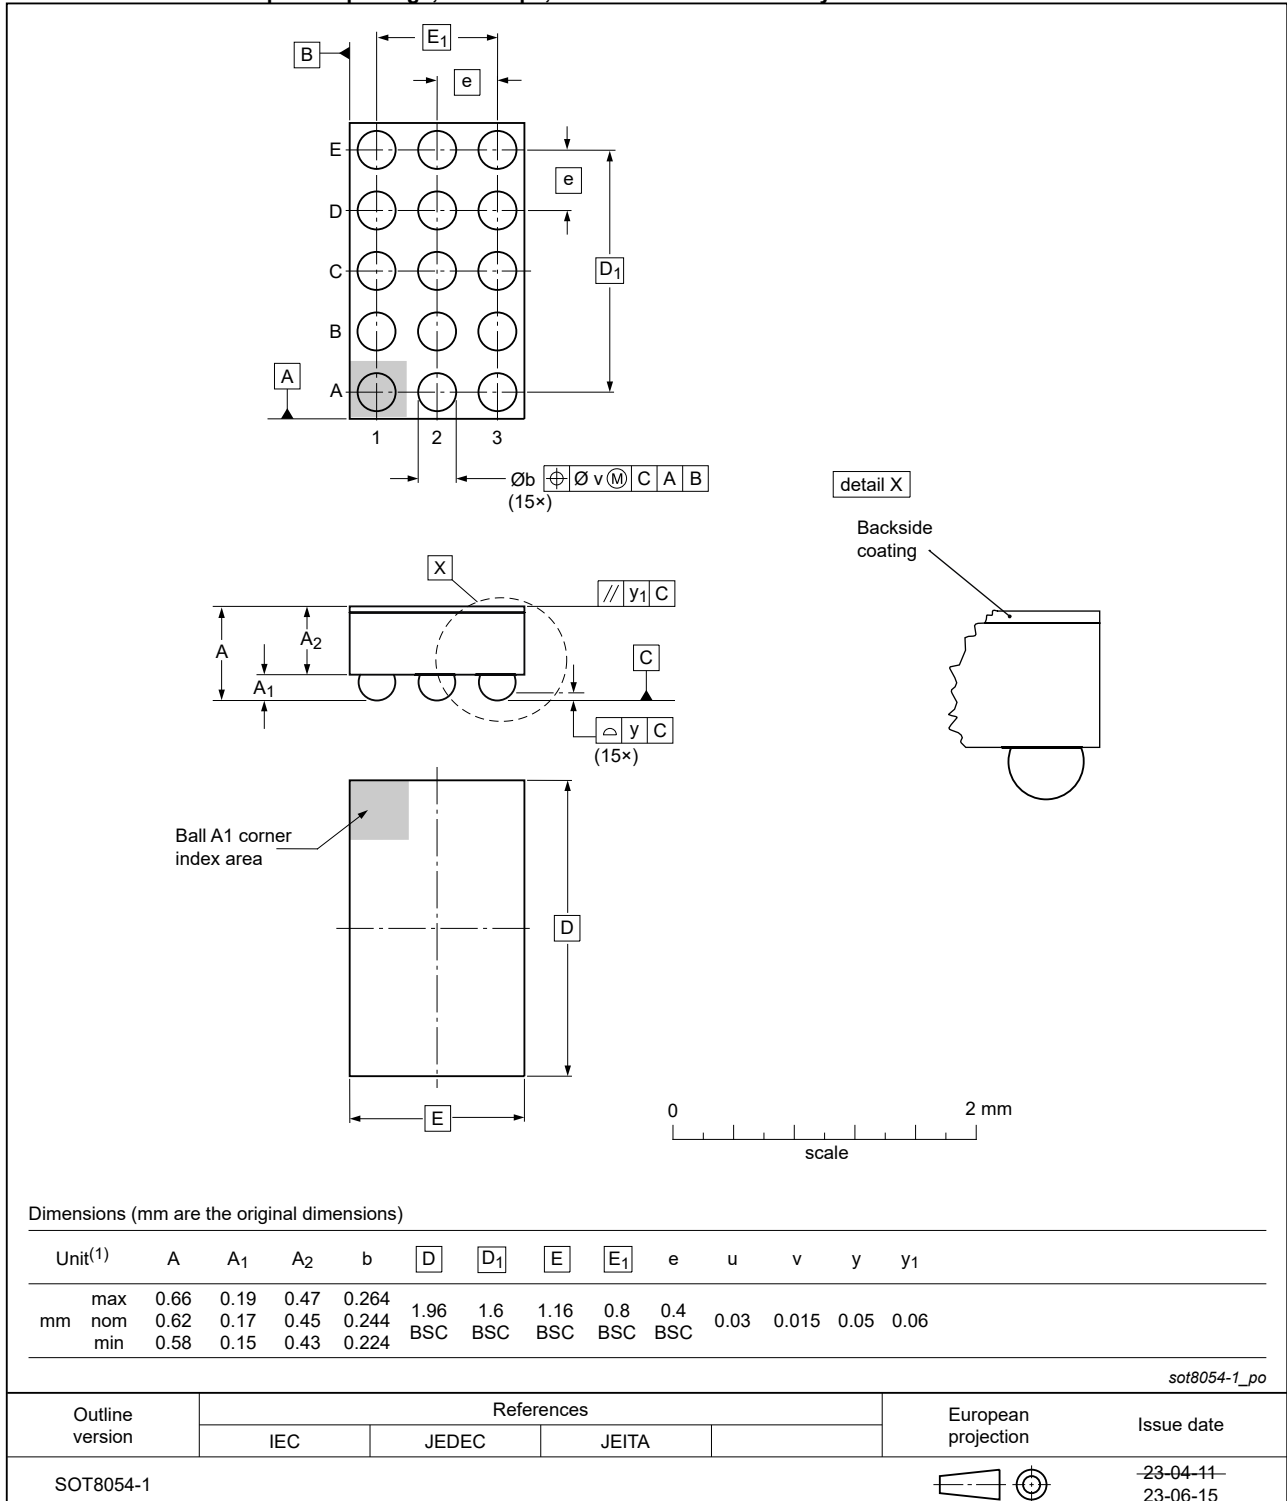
Package outline SOT8054-1 (WLCSP15)
